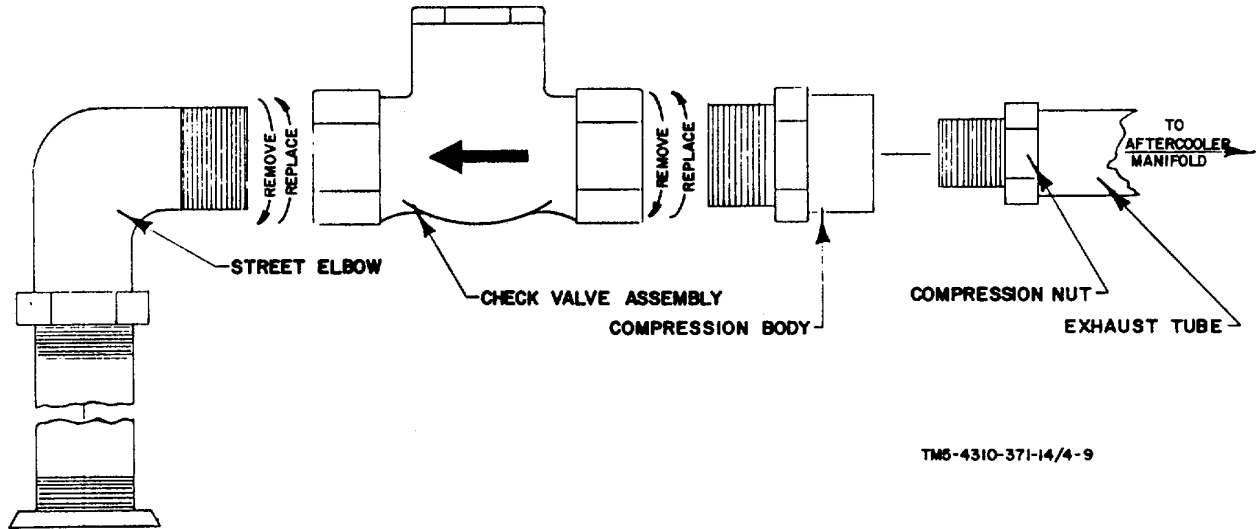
CHECK VALVE REMOVAL AND REPLACEMENT
